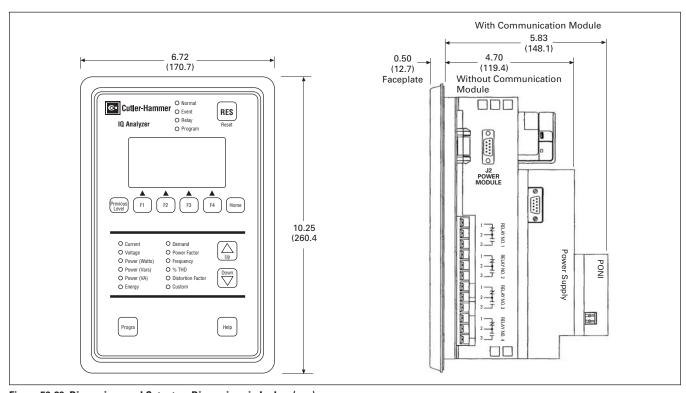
Dimensions and Cutout — Dimensions in Inches (mm) $\,$
